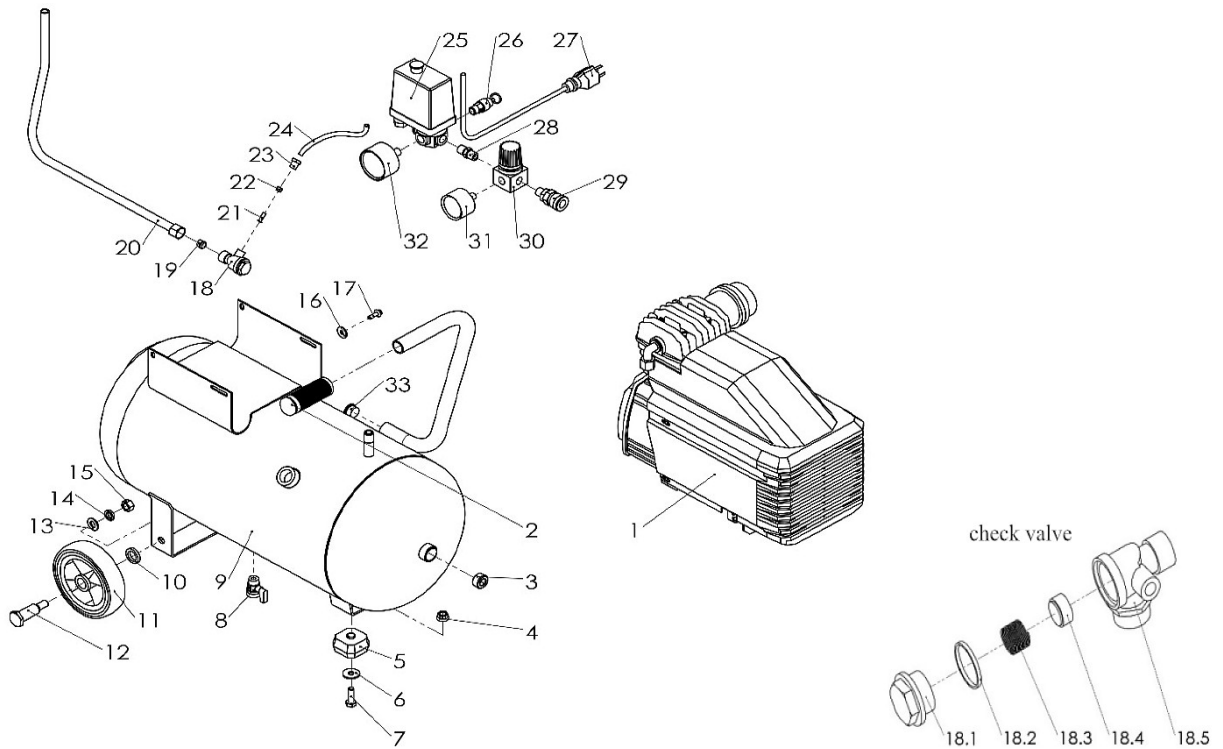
Spare parts drawing 1 MOBILBOY 261/24 AC
